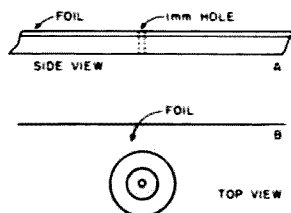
A 1 mm hole is drilled in the board where a component lead is to be placed (a), and then the isolated pad is formed with a special tool (b).
